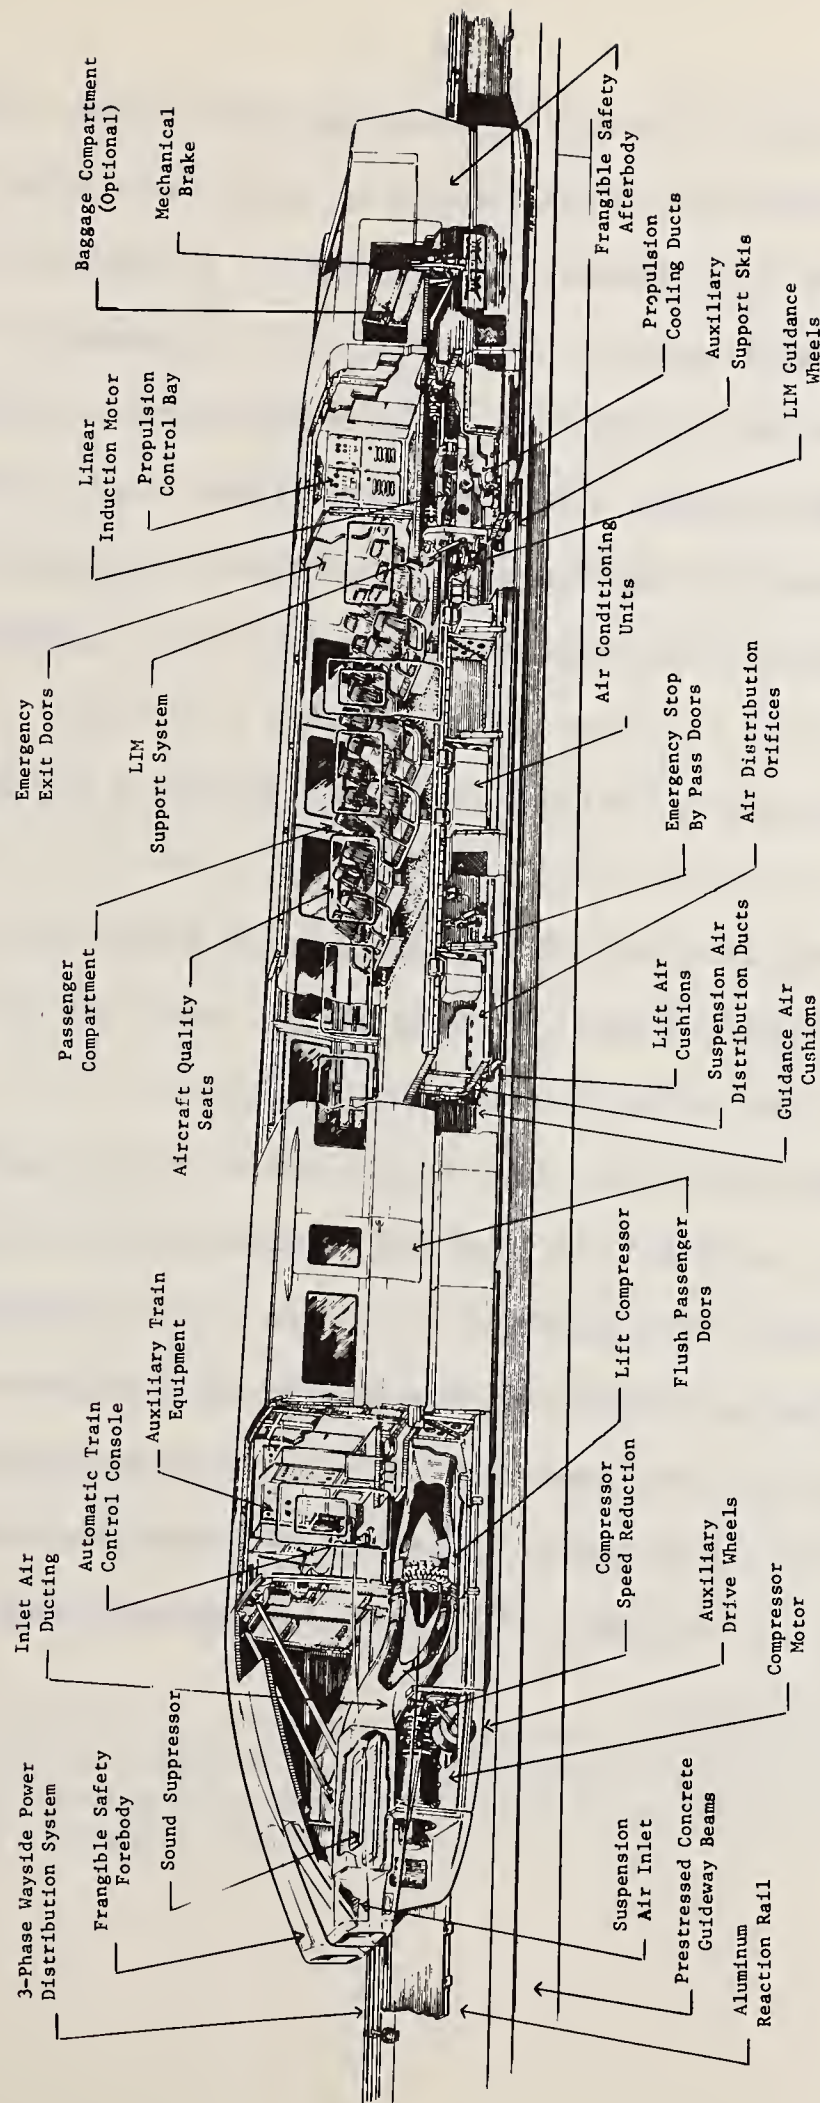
Cutaway view of the 60-passenger prototype UTACV
